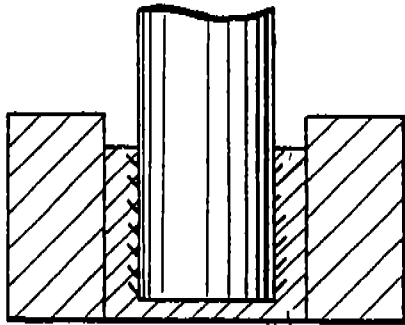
Sectional views illustrating the formation of crack.
